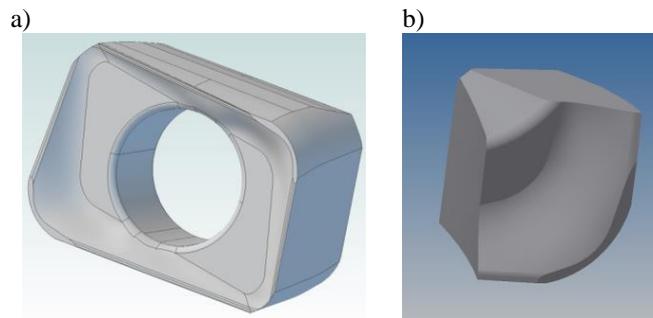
CAD model of cutting tool inserts (a) with magnified cutting edge (b)
